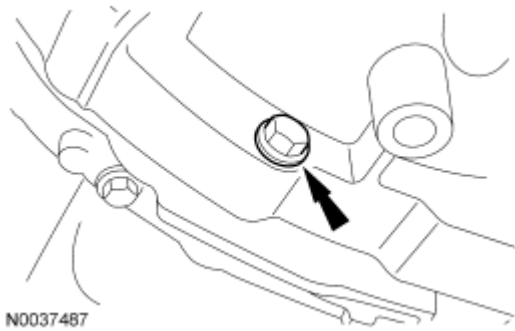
Locating Bellhousing-To-Oil Pan Bolt
